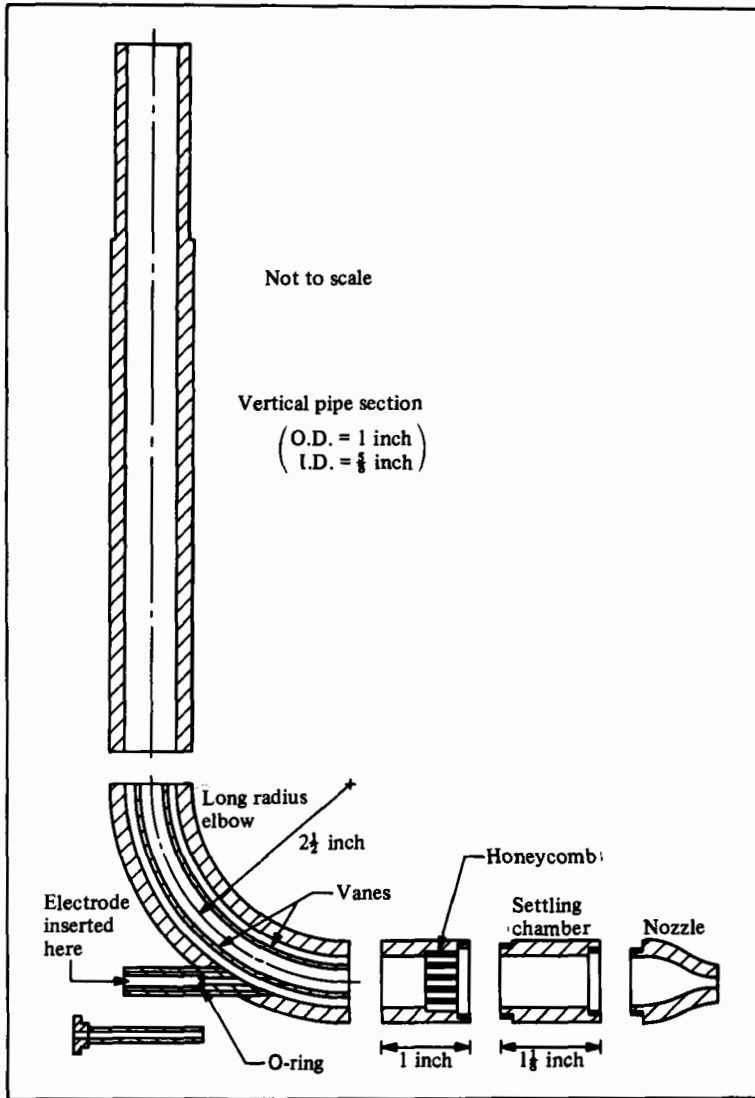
Diagram showing the geometrical details of the nozzle assembly.
